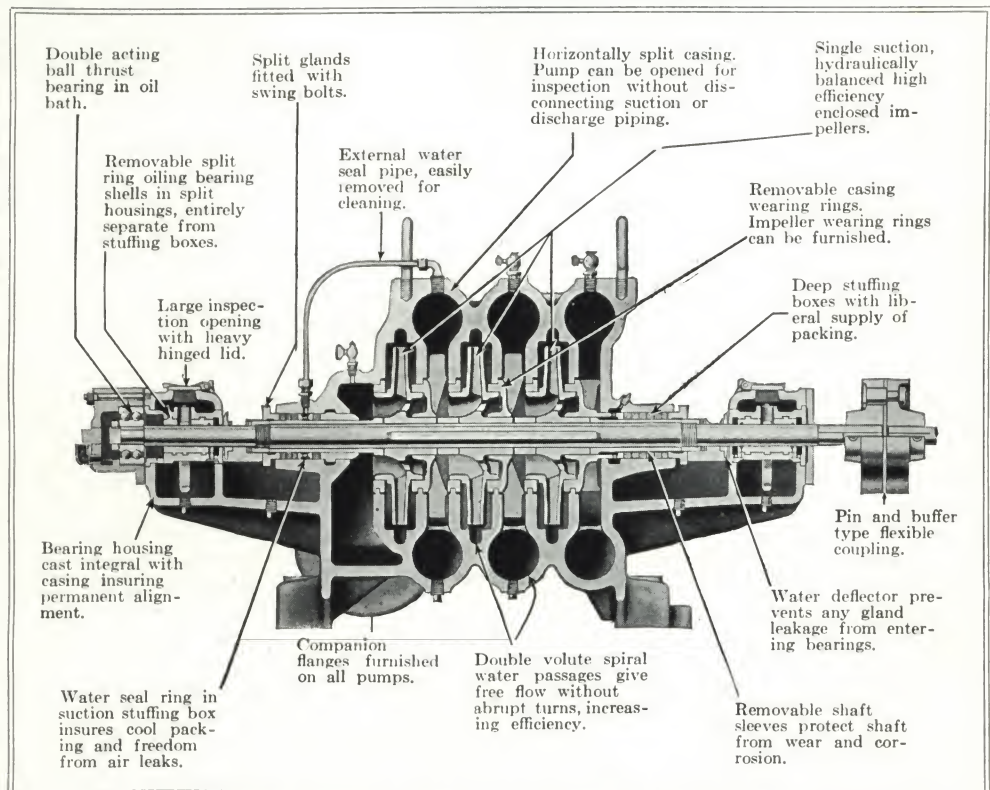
Sectional View of Multi-stage Centrifugal Pump
